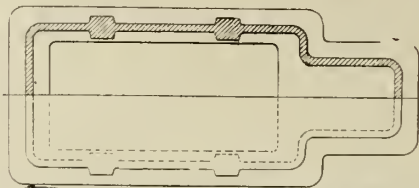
CROSS SECTION OF GEAR CASING CUT THROUGH BOSSES. OUTSIDE LINE SHOWS FLANGE. INSIDE LINE SHOWS THE ONLY OPENING IN THE CASTING.
